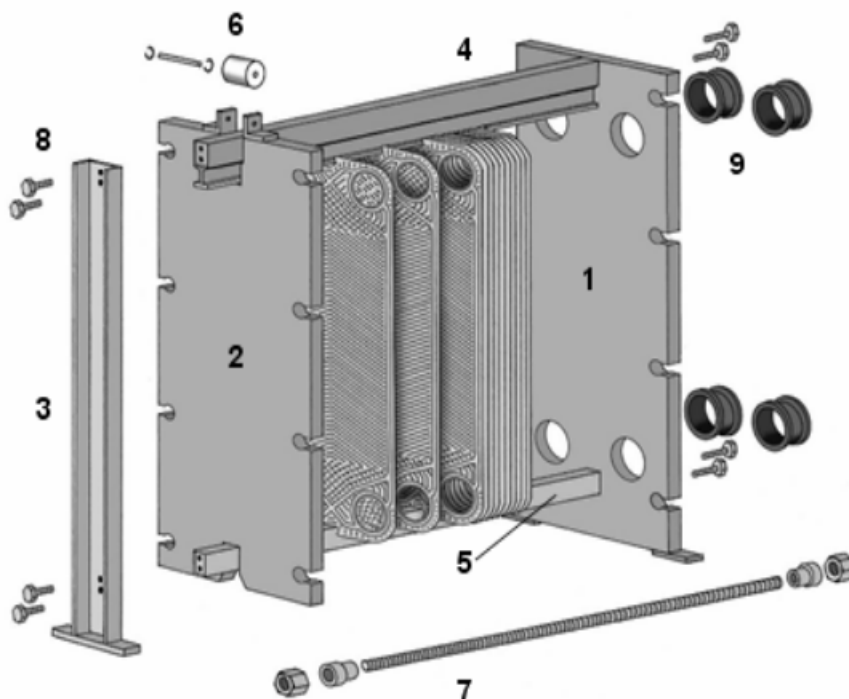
The device of a collapsible plate heat exchanger: 1 – fixed plate, 2 – movable plate, 3 – vertical column, 4 – upper horizontal rod, 5 – lower horizontal rod, 6 – fixing screw, 7 – coupling screw, 8 – bolt, 9 – fitting
